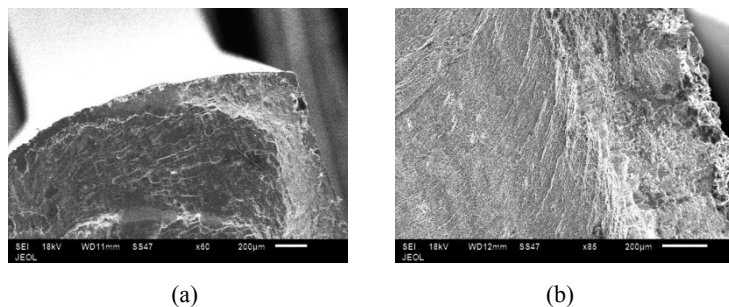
Fatigue fracture morphology showing the crack initiation points: (a) as-welded and (b) as-welded and peened.
